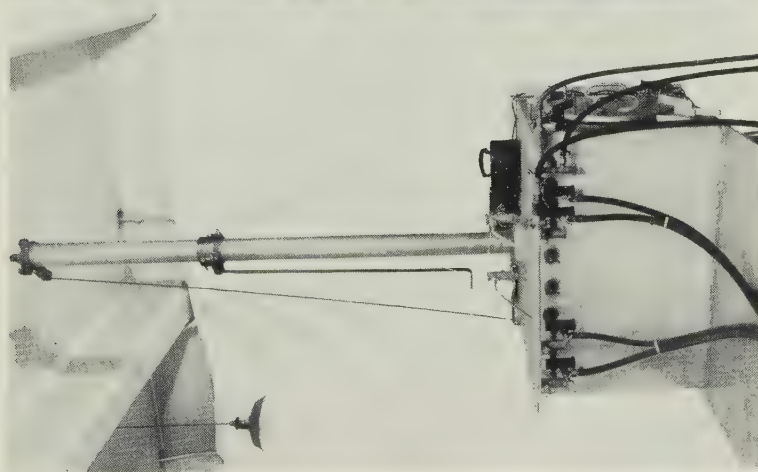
Rear View of Welding Chamber, Showing Back-Pressure Valves and Outlet Manifold.
